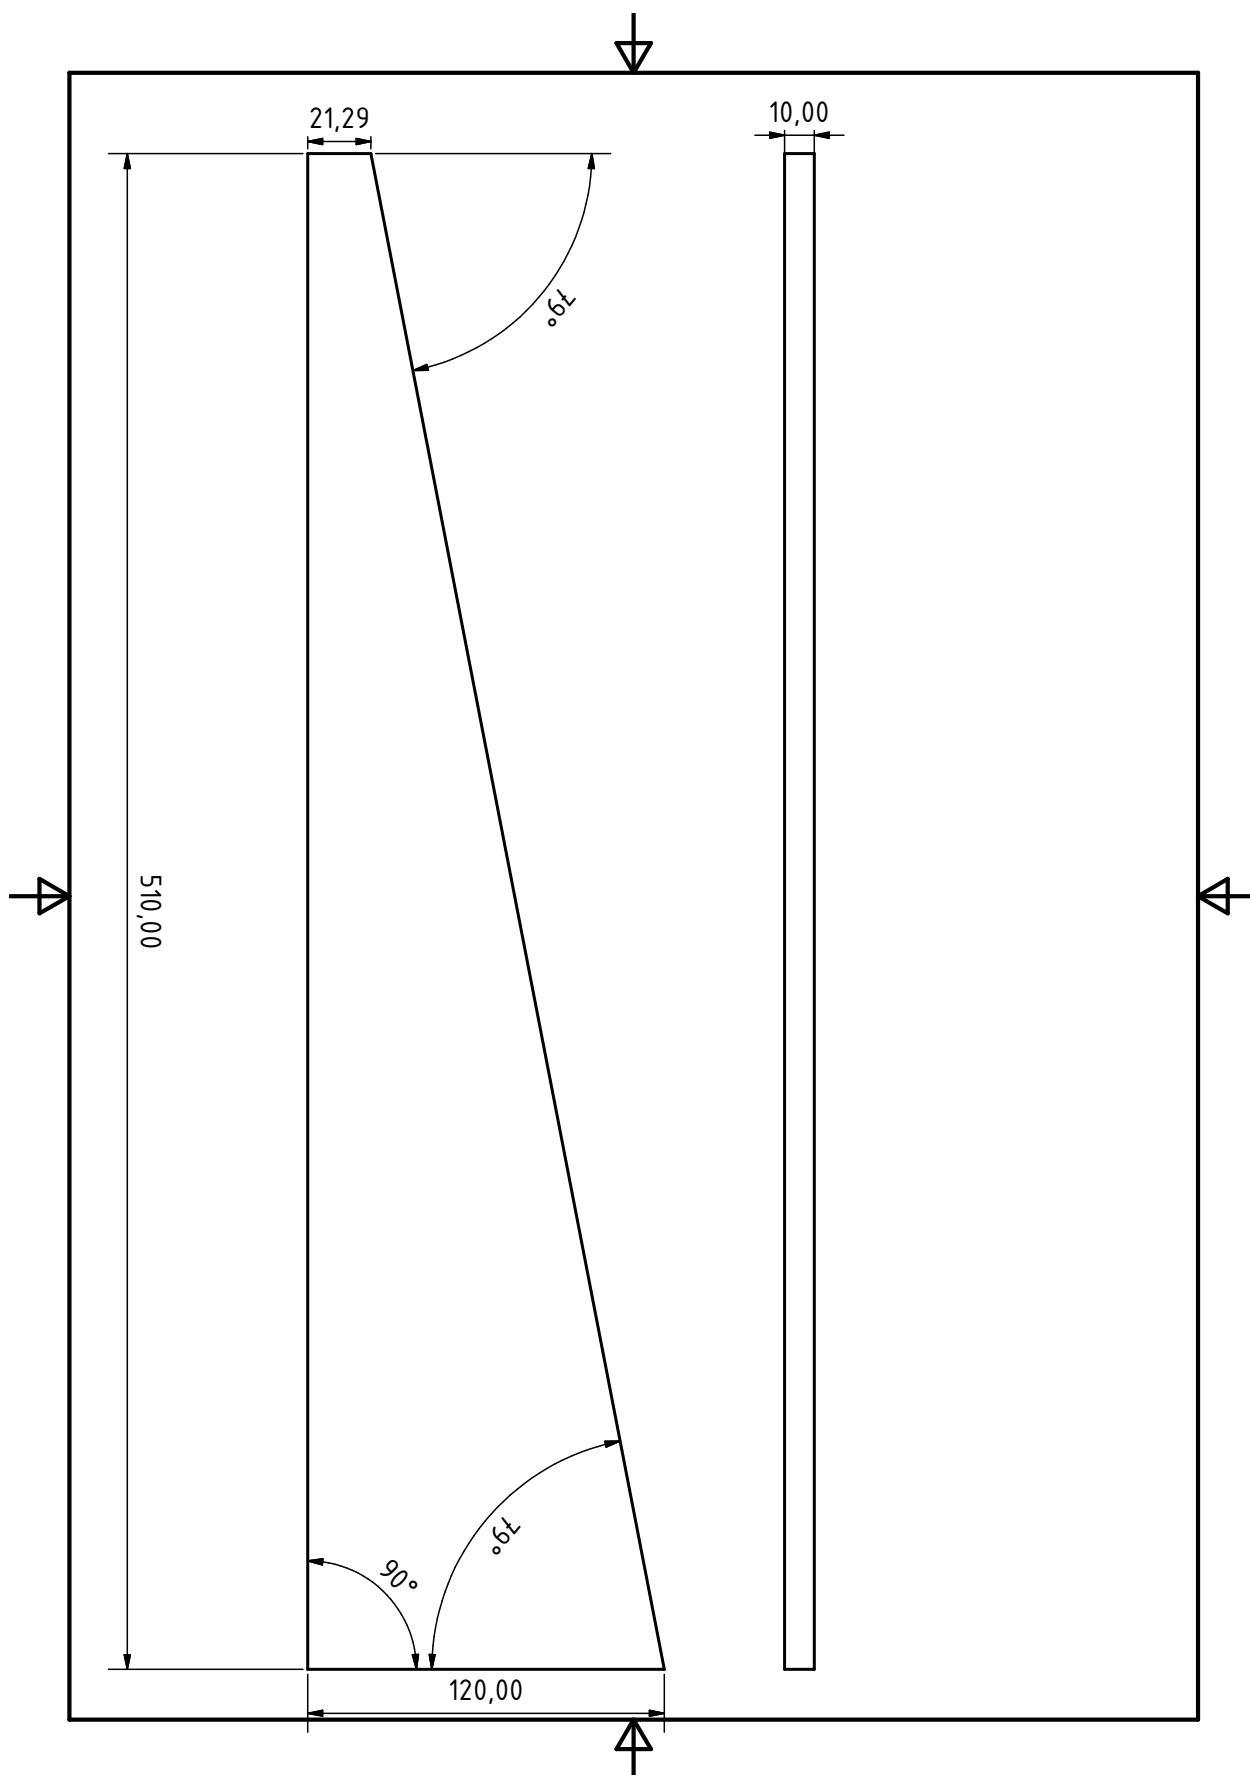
CAD sketch of stiffener side part of the laser holder.
